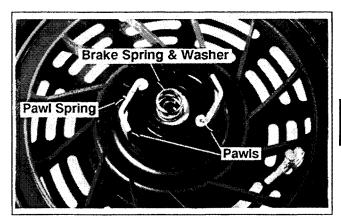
Brake Spring And Washer, Pawls, And Pawl Springs.
